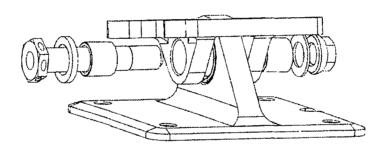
Exploded lug and clevis joint. (Rear Right shown, others similar)
